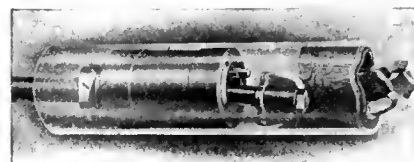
REMOVING SCALE FROM INSIDE OF BOILER TUBE.
